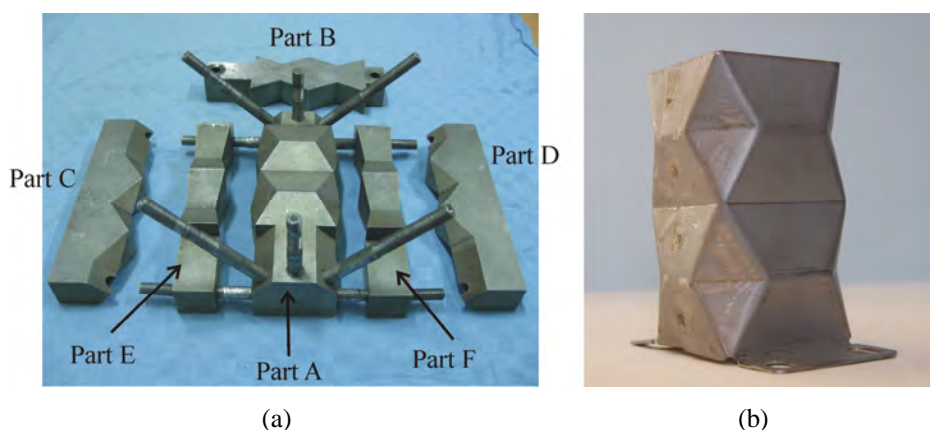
(a) Steel moulds, and (b) prototype origami tube.
